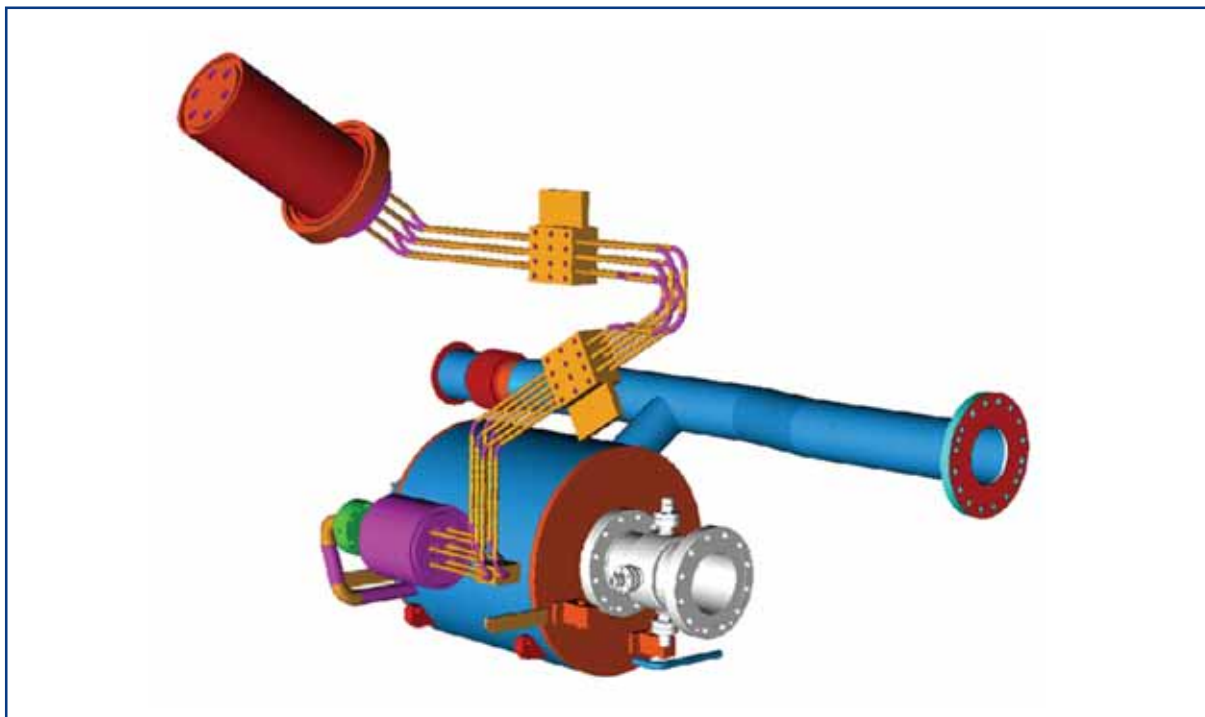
CAD cut-away view of the type-3+ cryomodule.
